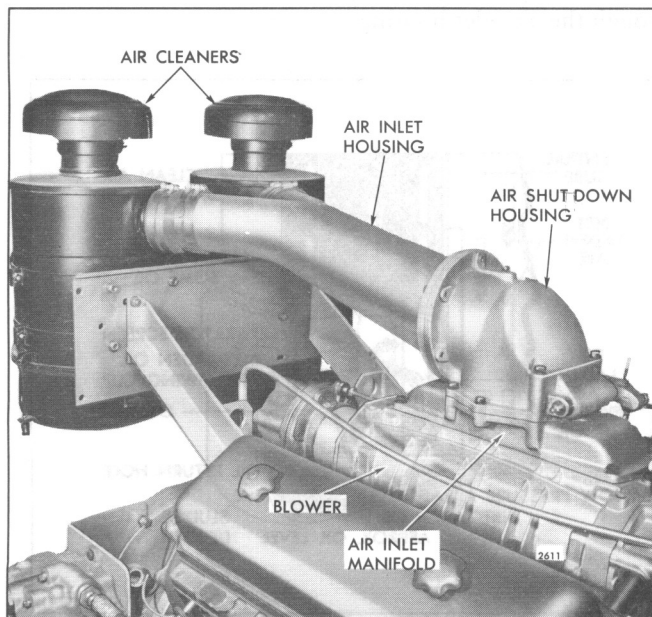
Typical Oil Bath Air Cleaner Mounting
